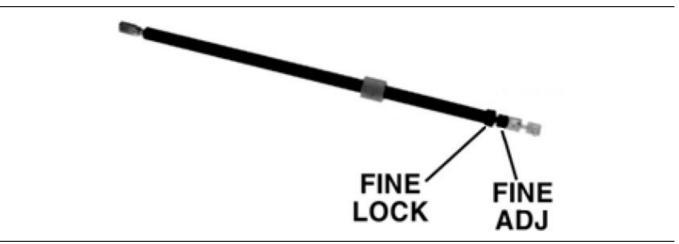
Using the Fine Lock Ring and Fine Lock Adjustment
